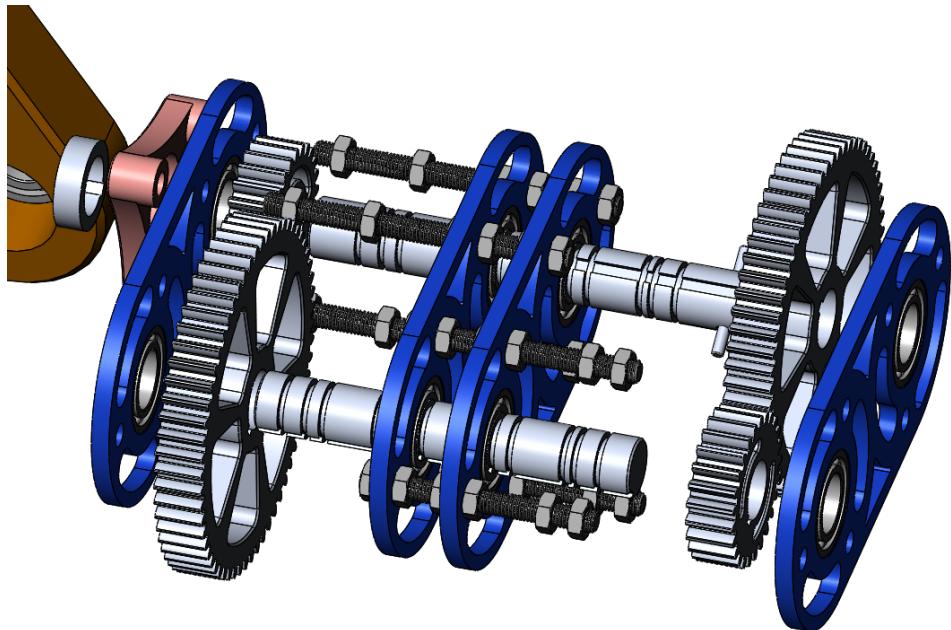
Hirani, Asimm: Assembly Step 5
